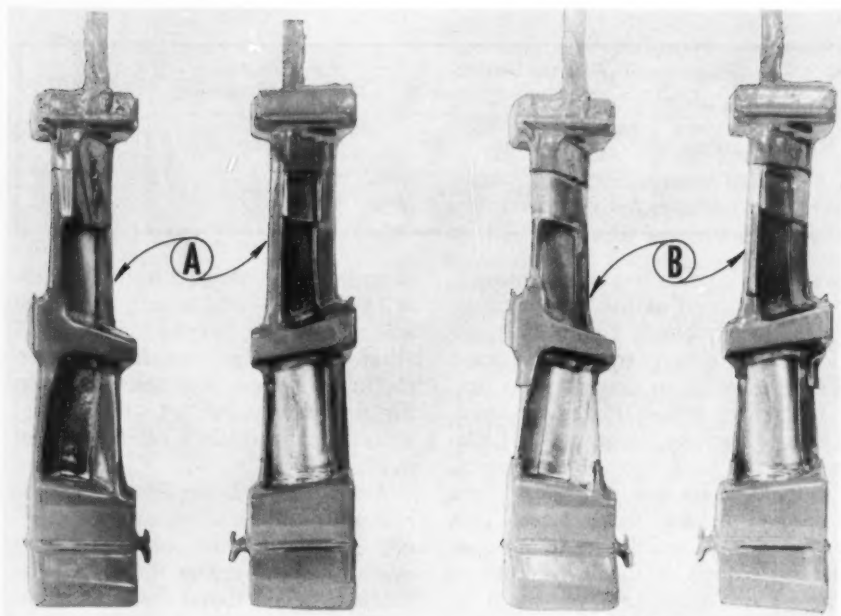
View (A) shows the second step and view (B) shows the third step of the process.
